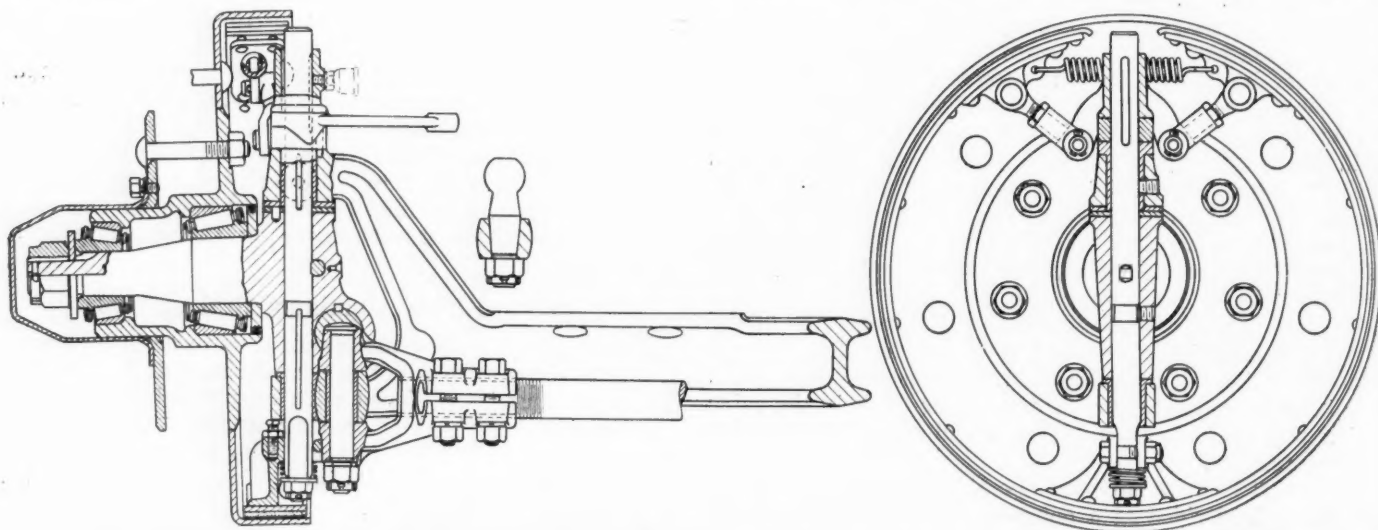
Shuler front wheel brake for truck and bus application. Brake is applied by face cams mounted on an extension of the knuckle pin
